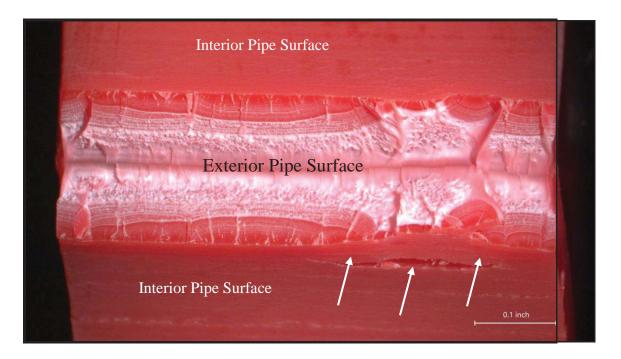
(A) Partial cracks that were mechanically opened to expose the fracture surfaces. These cracks clearly initiated at the interior surface of the pipe and penetrated up to 40% of the pipe wall at this location. Numerous additional crack existed along the full length of Sminkey Sample PPX-46, around the entire pipe circumference.
